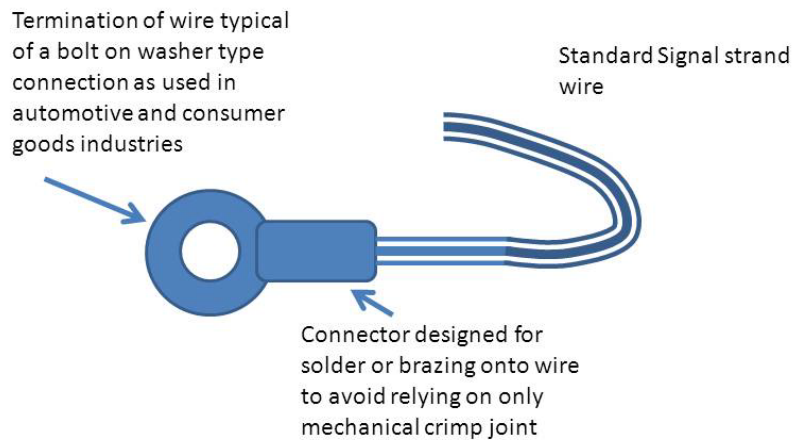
Suggest Bolt-On Connection Wire Termination (Typical)
